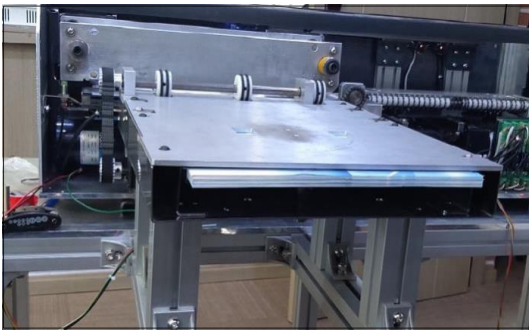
Automatic cover insertion part of adhesive wireless bookbinding machine
